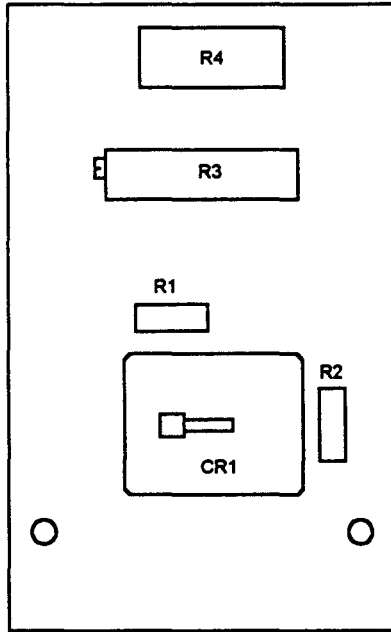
PRINTED CIRCUIT BOARD (HG-527)
